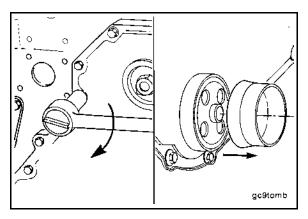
TIGHTEN THE FRONT GEAR COVER MOUNTING CAPSCREWS
